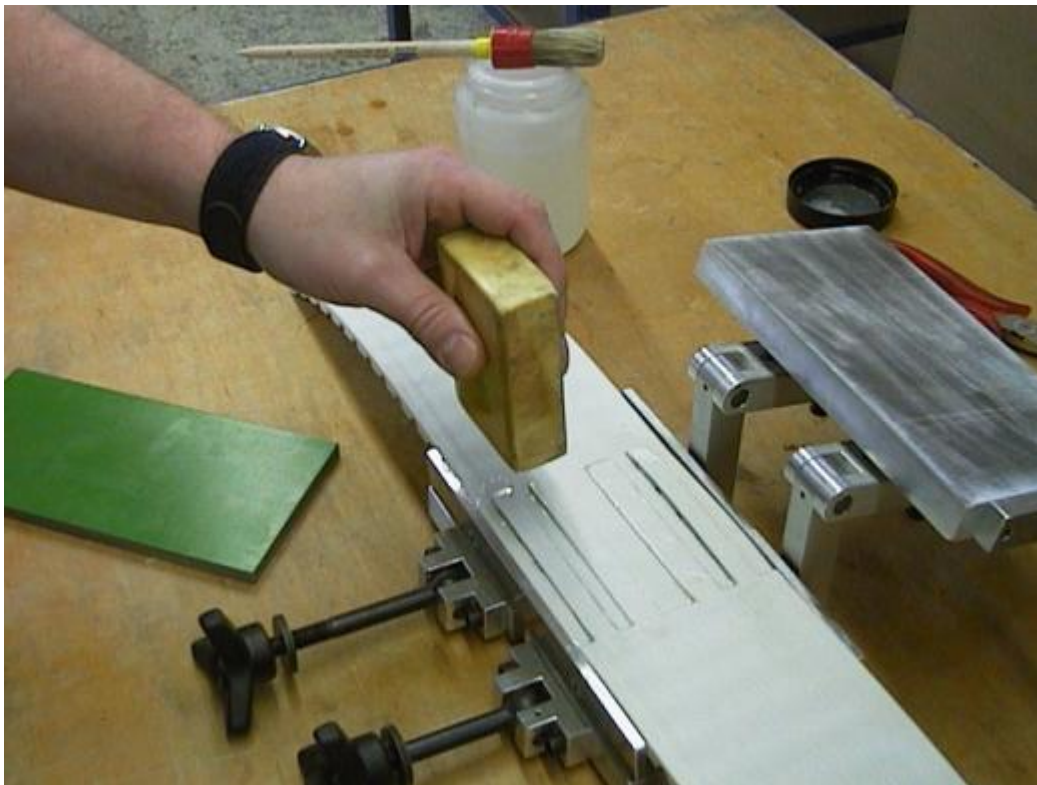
Press timing belt sections into the welder by lightly tapping with a plastic part.
